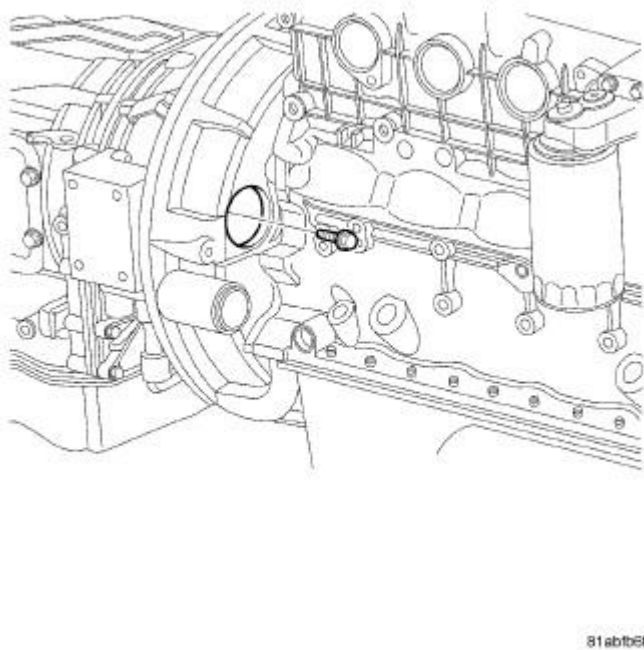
Identifying Bolts & Bell Housing Access Cover
